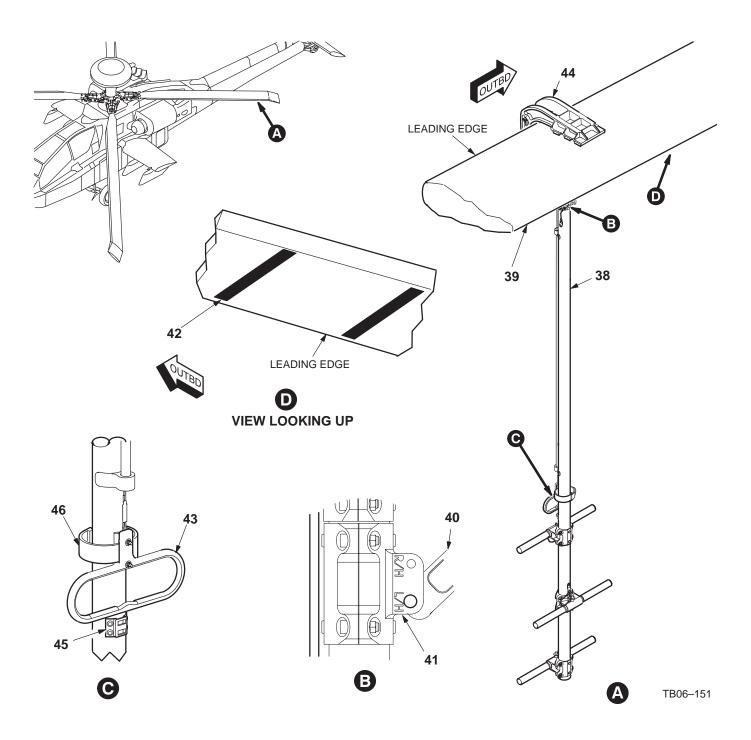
Installation of Blade Handling Pole on Inboard Stripe L/H Aft Main Rotor Blade
